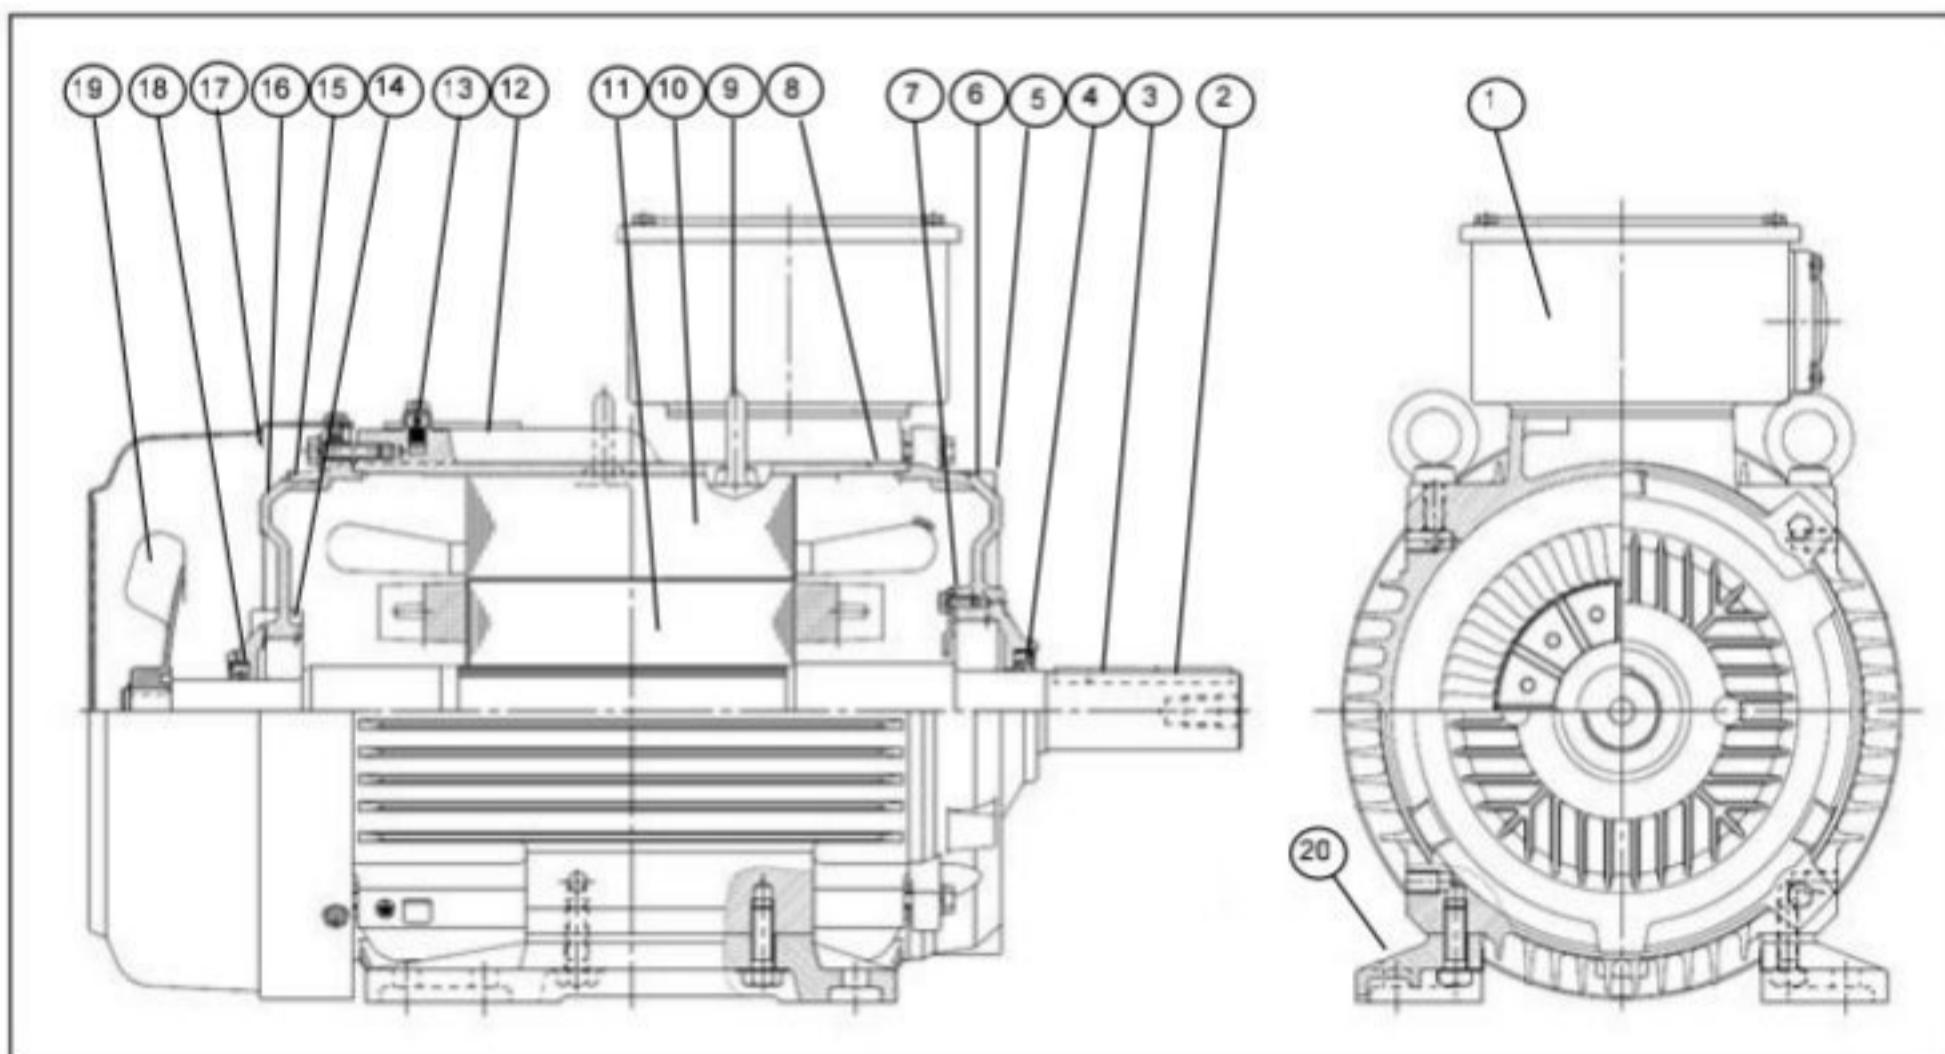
Schematic diagram of 63 – 132 frame aluminium motor, feet version
